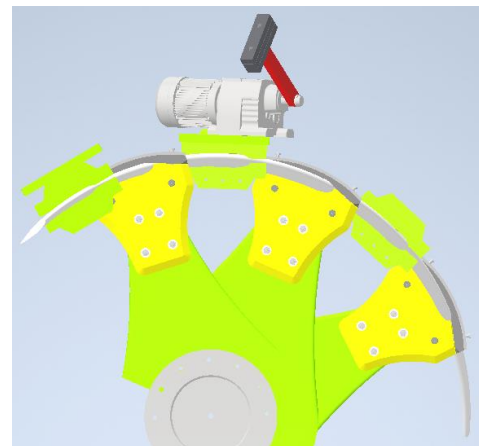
Representative test fixture with rotating mass fatigue test equipment mounted on the blade.
